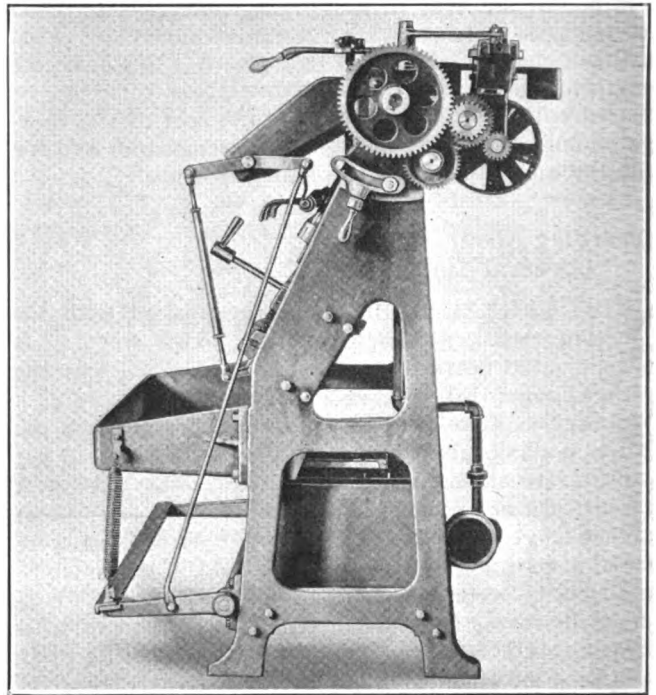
END VIEW OF HOLMES THREADING MACHINE
